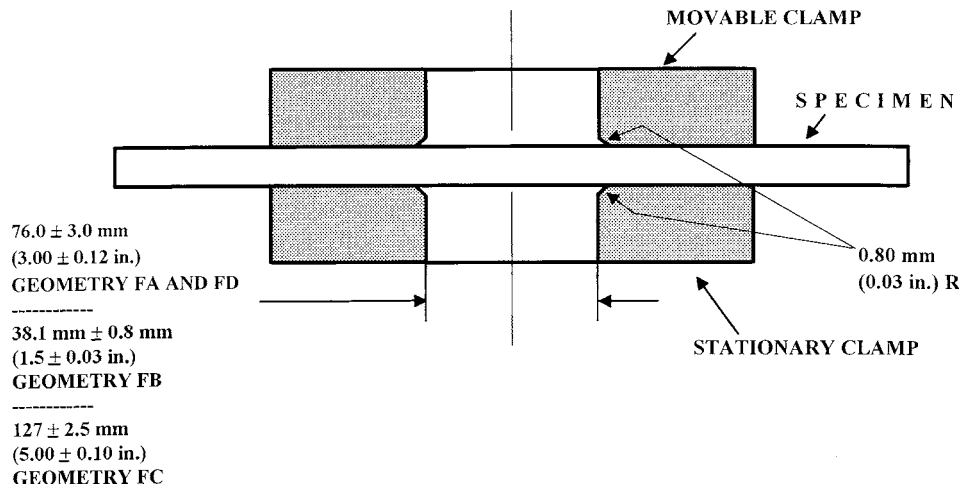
Support Plate/Specimen/Clamp Configuration for Geometries FA, FB, FC, and FD
